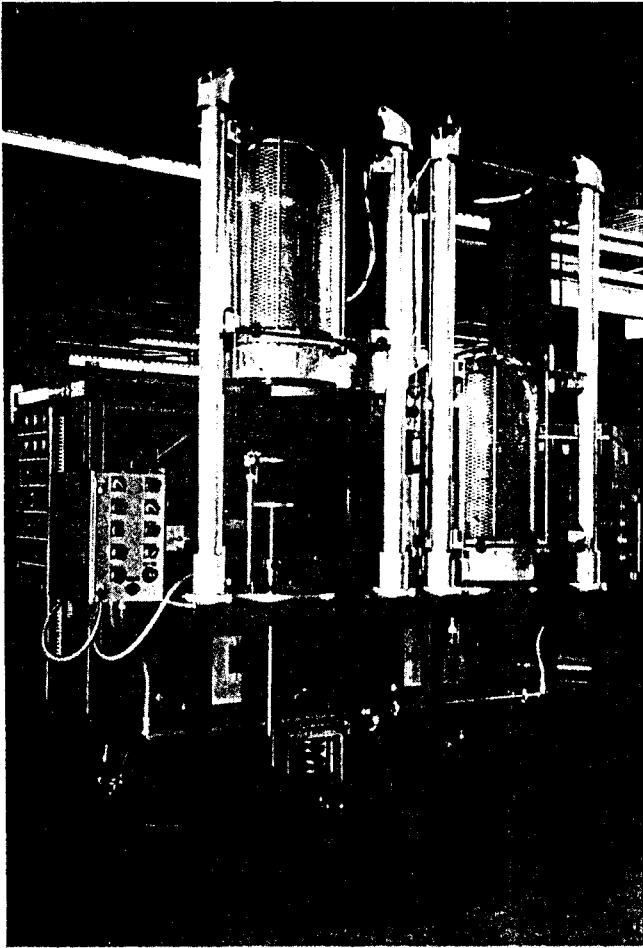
Production Arrangement for Induction Brazing in Controlled Atmosphere or Vacuum Showing Dual Station Bell Jar Fixture, Induction Generator, Movable Stand, Generator and Gas Controls, and Supports to Facilitate Up and Down Movement of Bell Jar
